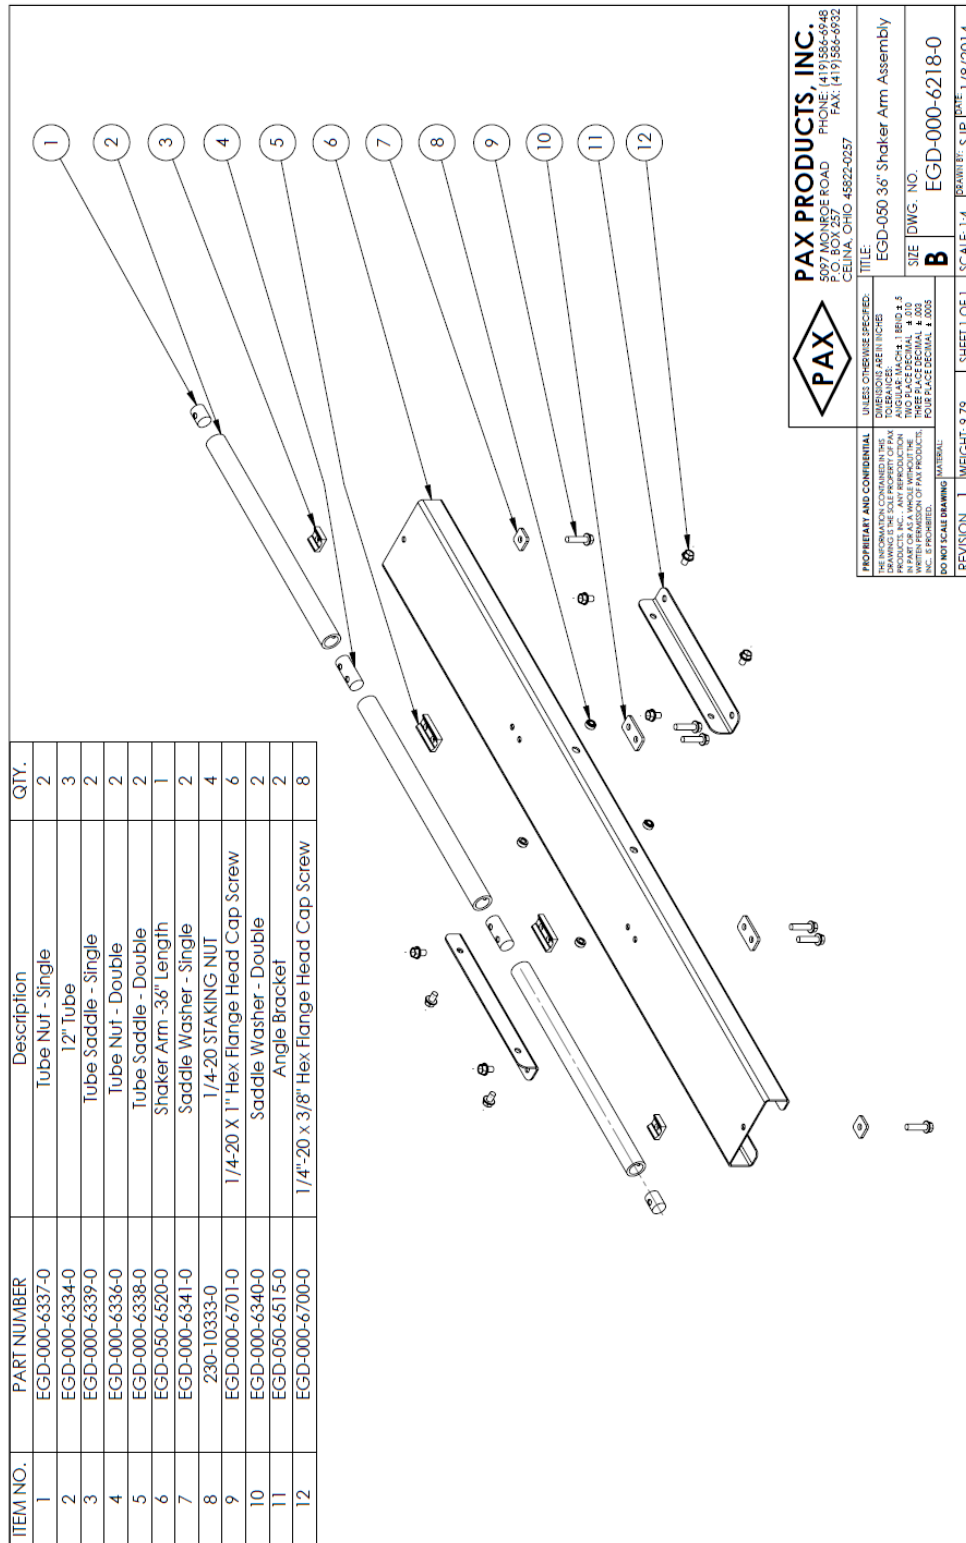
EGD-000-6218-0 EGD-050 36" SHAKER ARM ASSEMBLY
